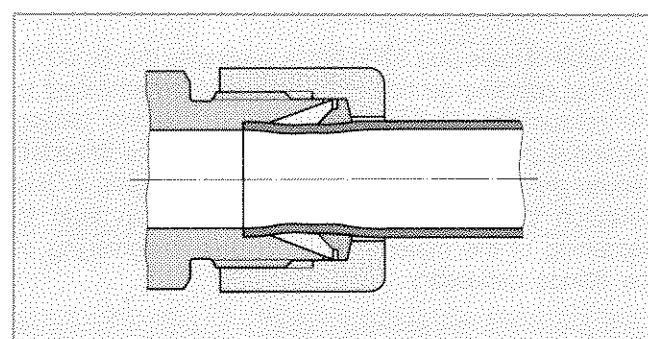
Compression joint, metal-to-metal seal, securing function by clamping
